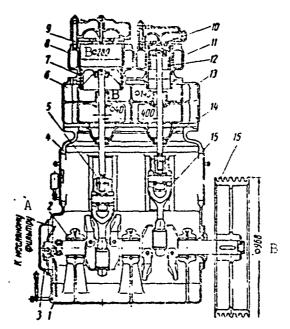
Compressor: 1) crank case; 2) crank shaft; 3) oil pump; 4) housing; 5) crosshead; 6) intermediate piece (connector) with packing glands; 7) piston of first stage; 8) cylinder of first stage; 9) valve of first stage; 10) valve of second stage; 11) cylinder of second stage; 12) piston of second stage; 13) gas gland; 14) oil gland; 15) connecting rod; 16) flywheel. A) To oil filter; B) diameter.
